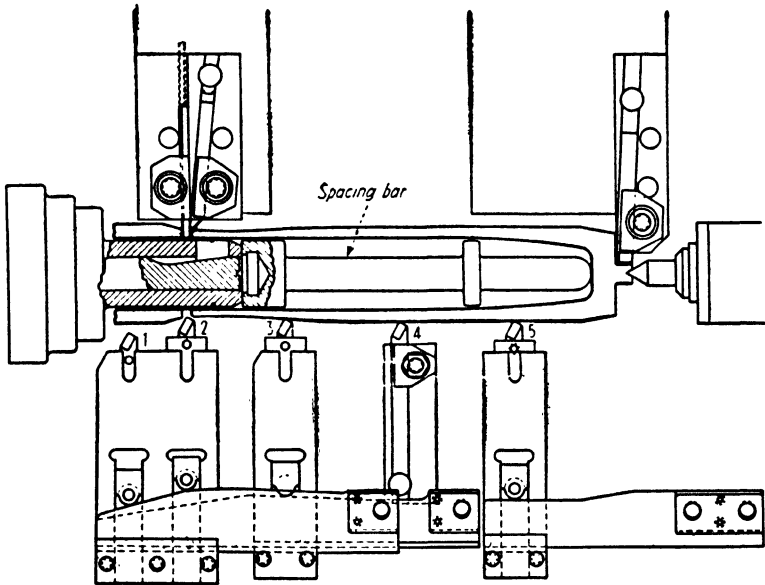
Set-Up of Eight Cutting Tools on Lathe for Rough-Turning of Shell
